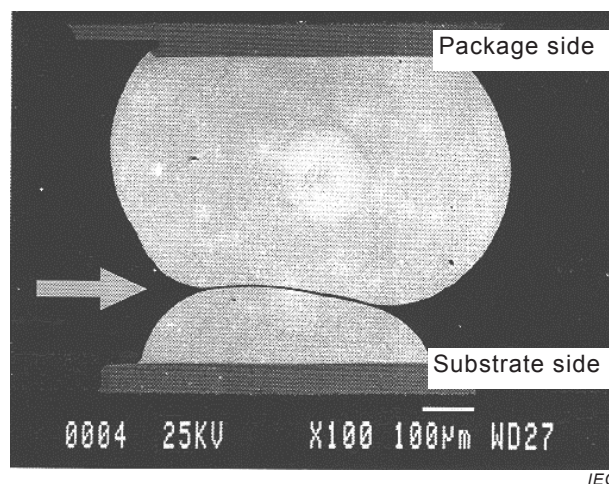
Repelled solder caused by contamination on the solder ball surface
